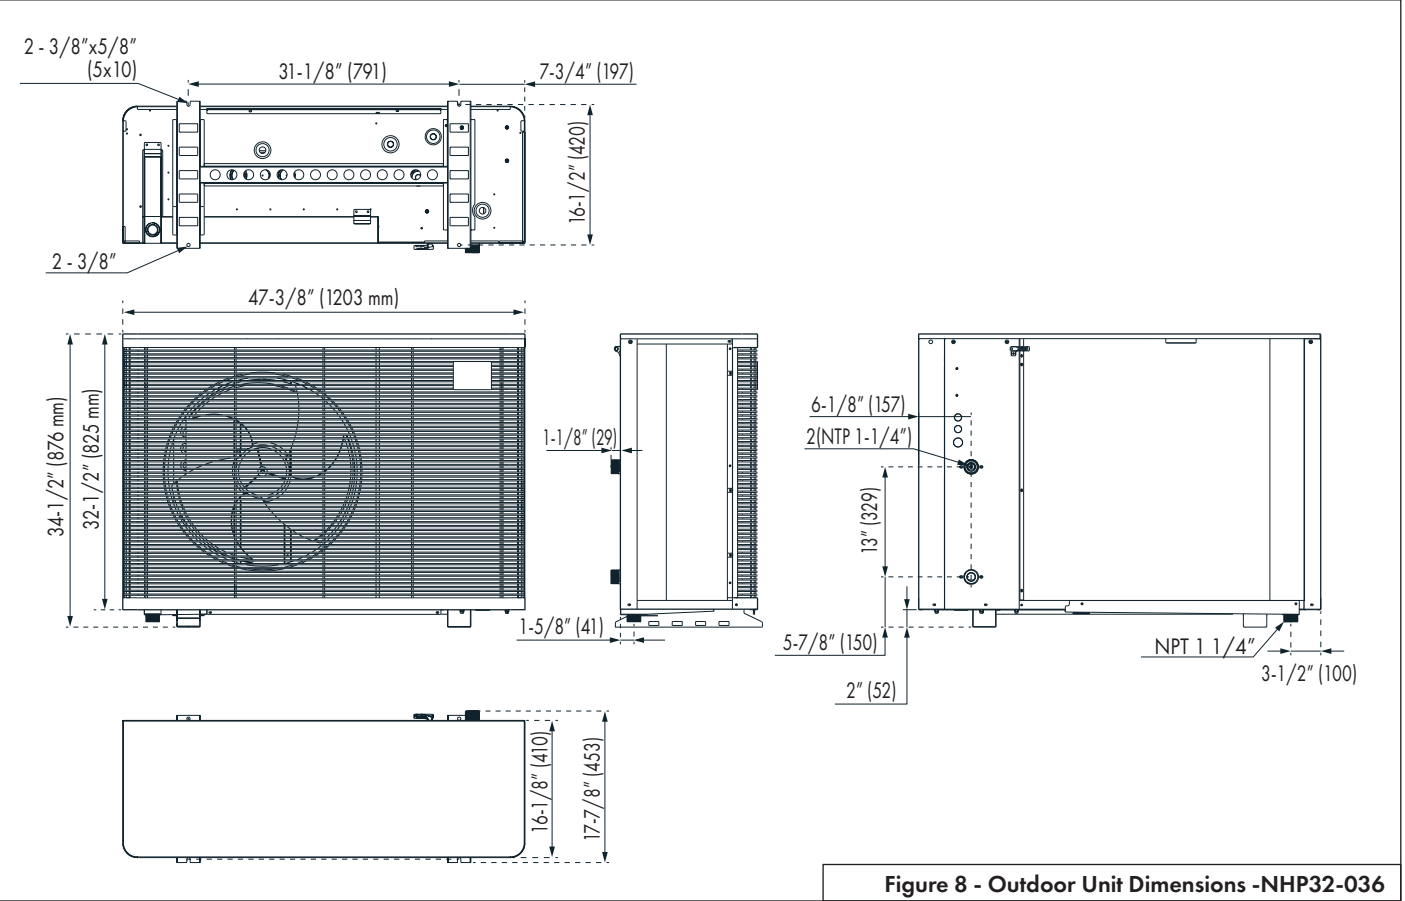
Outdoor Unit Dimensions - NHP32-036
